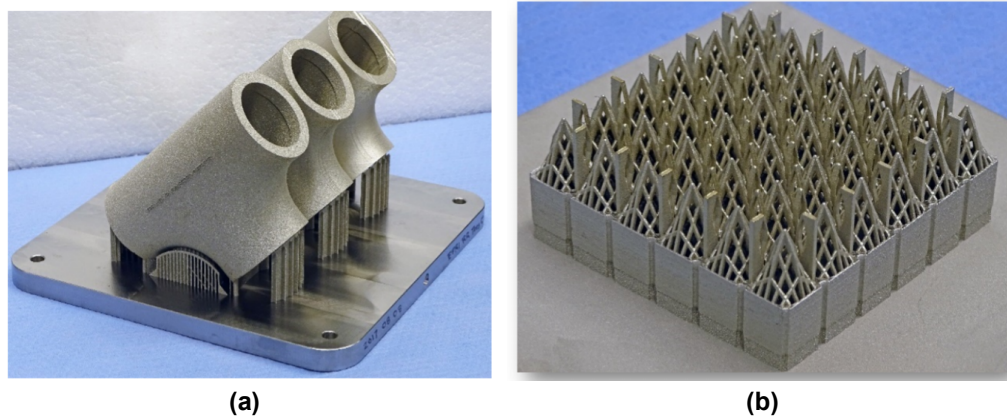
Examples of components processed via L-PBF: (a) 316L SS pipe 50.8 mm (2 in. dia.) Tee-section and (b) Inconel 718 debris filter 76.2 × 76.2 mm (3 in.×3 in.). Image courtesy of EPRI, used with permission. (Hull et al. 2019)
